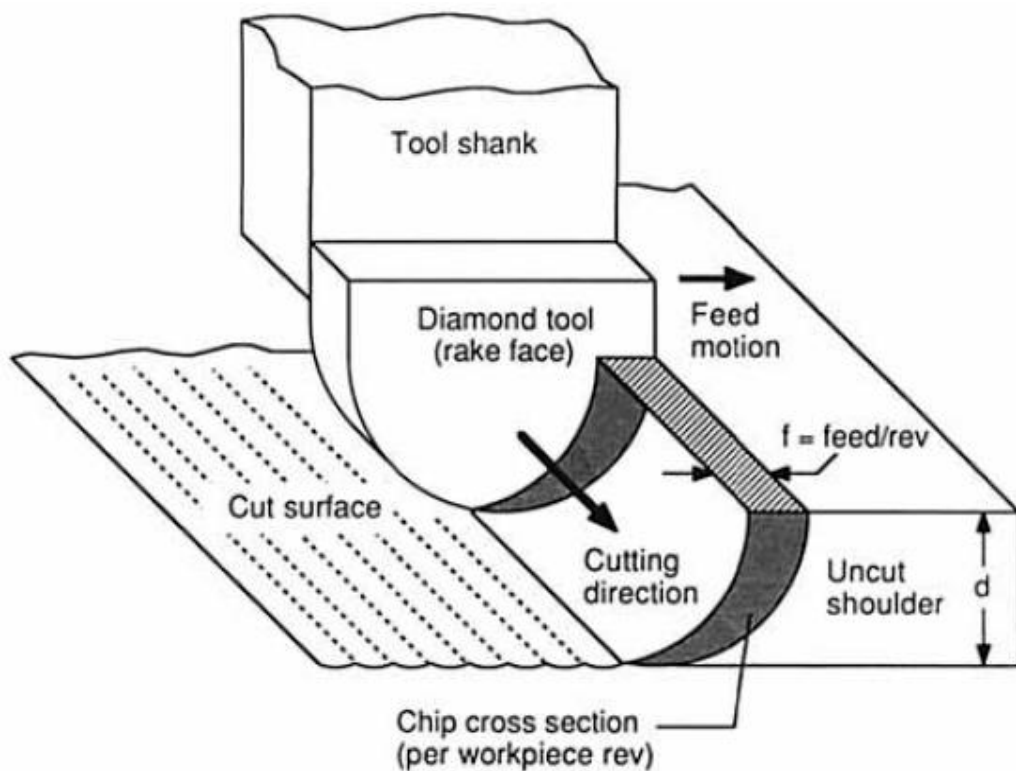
Ductile-regime machining model using a round nose cutting tool [22]
